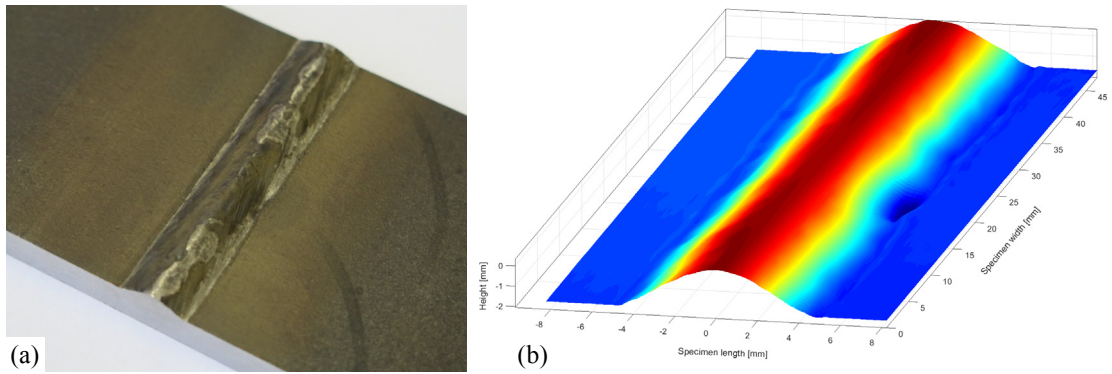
(a) Specimen geometry with weld toe exhibiting an undercut; (b) Result of the surface measurement and data processing
